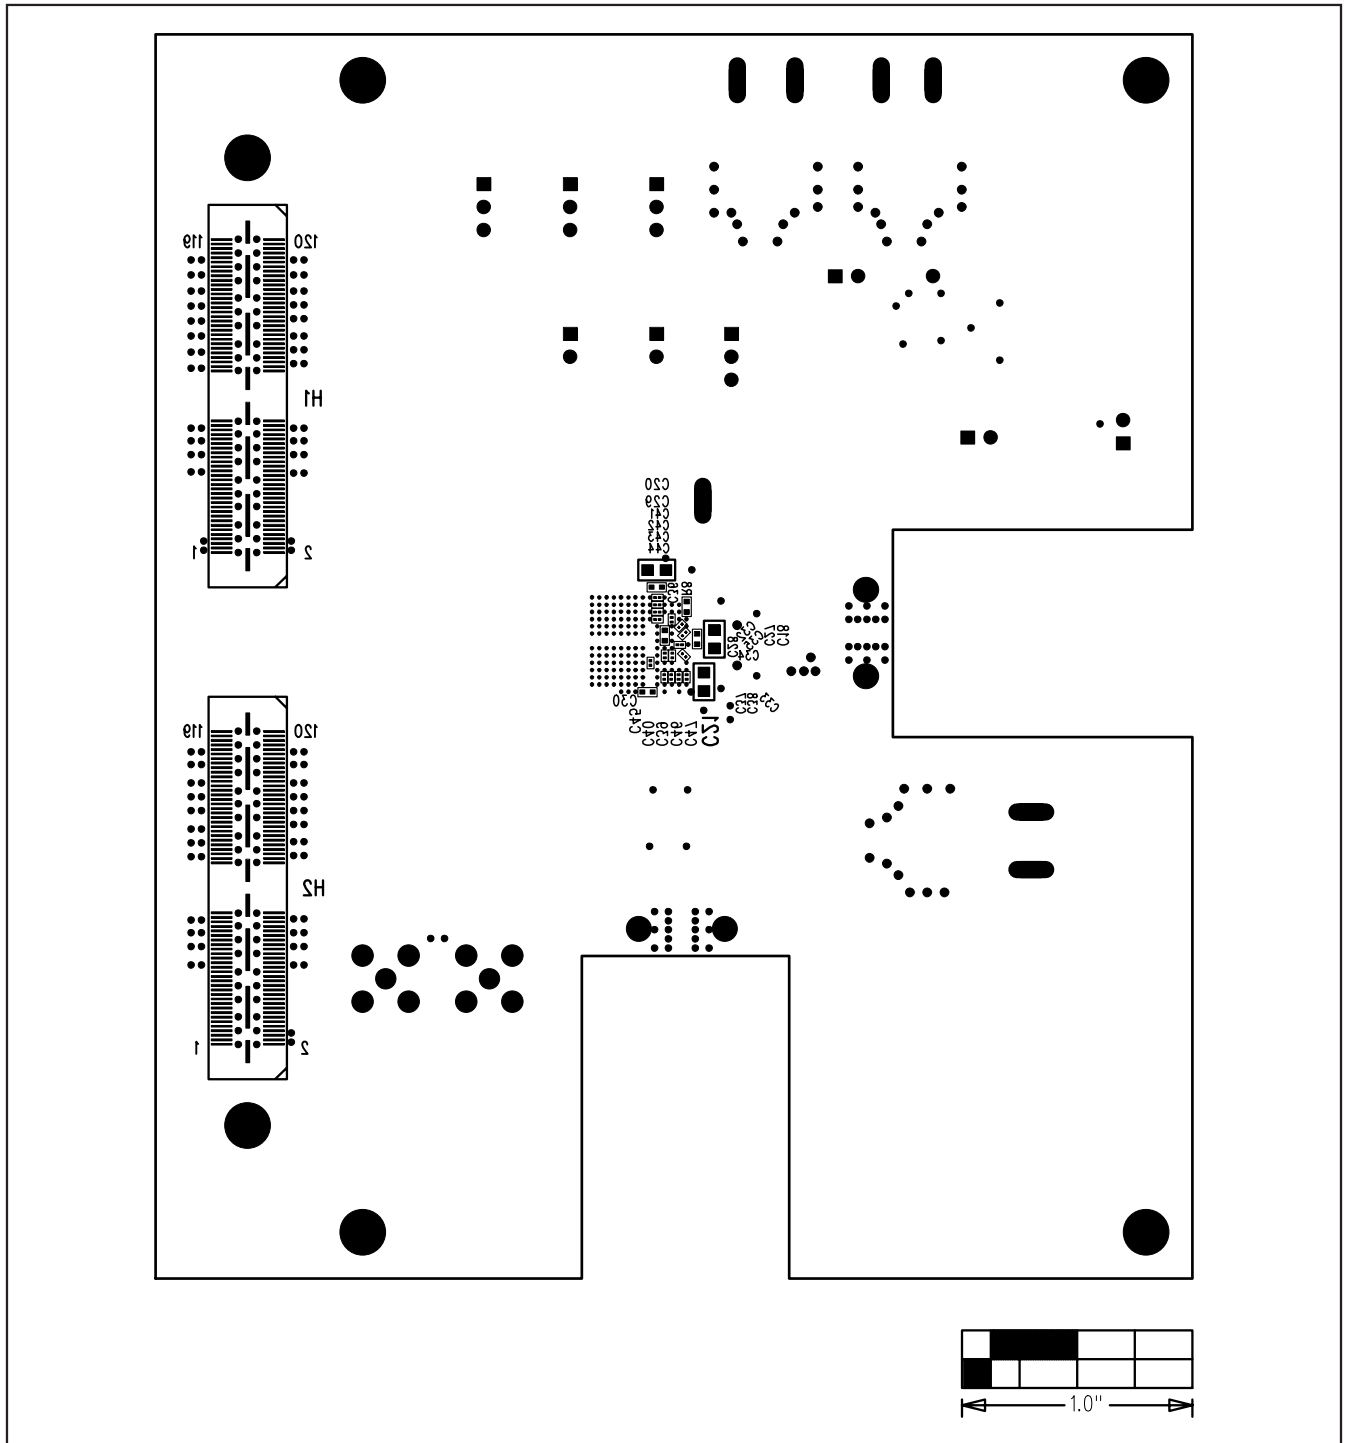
MAX19692/MAX19693 EV Kit Component Placement Guide—Solder Side
